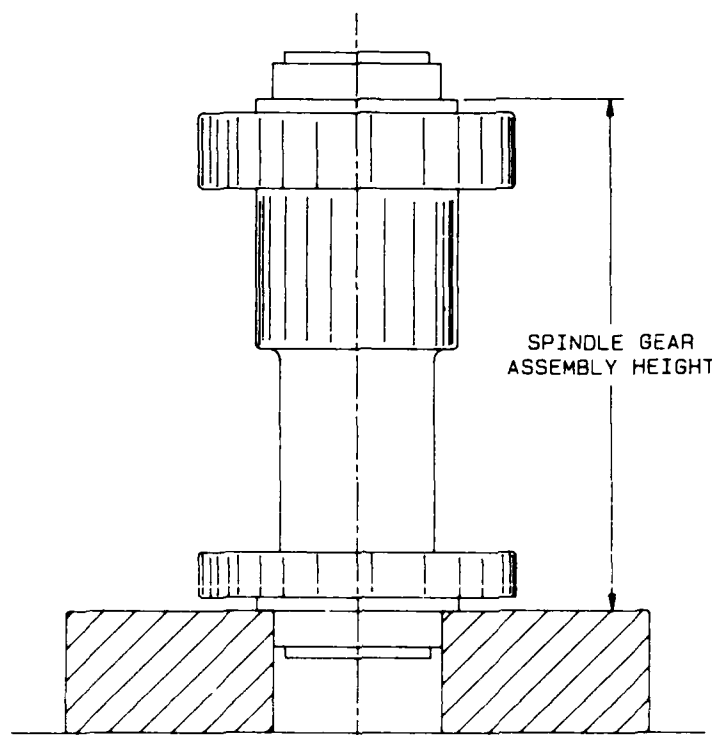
SETUP FOR SPINDLE ASSEMBLY HEIGHT MEASUREMENT
